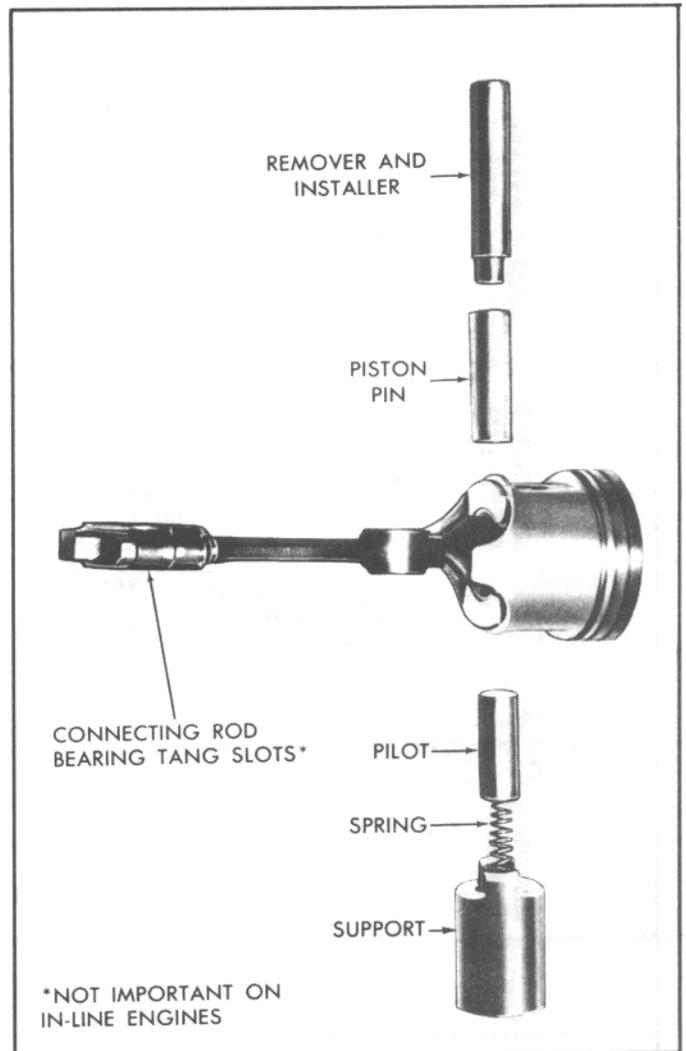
Piston Pin & Tool Layout (In-Line & "Small V8")
